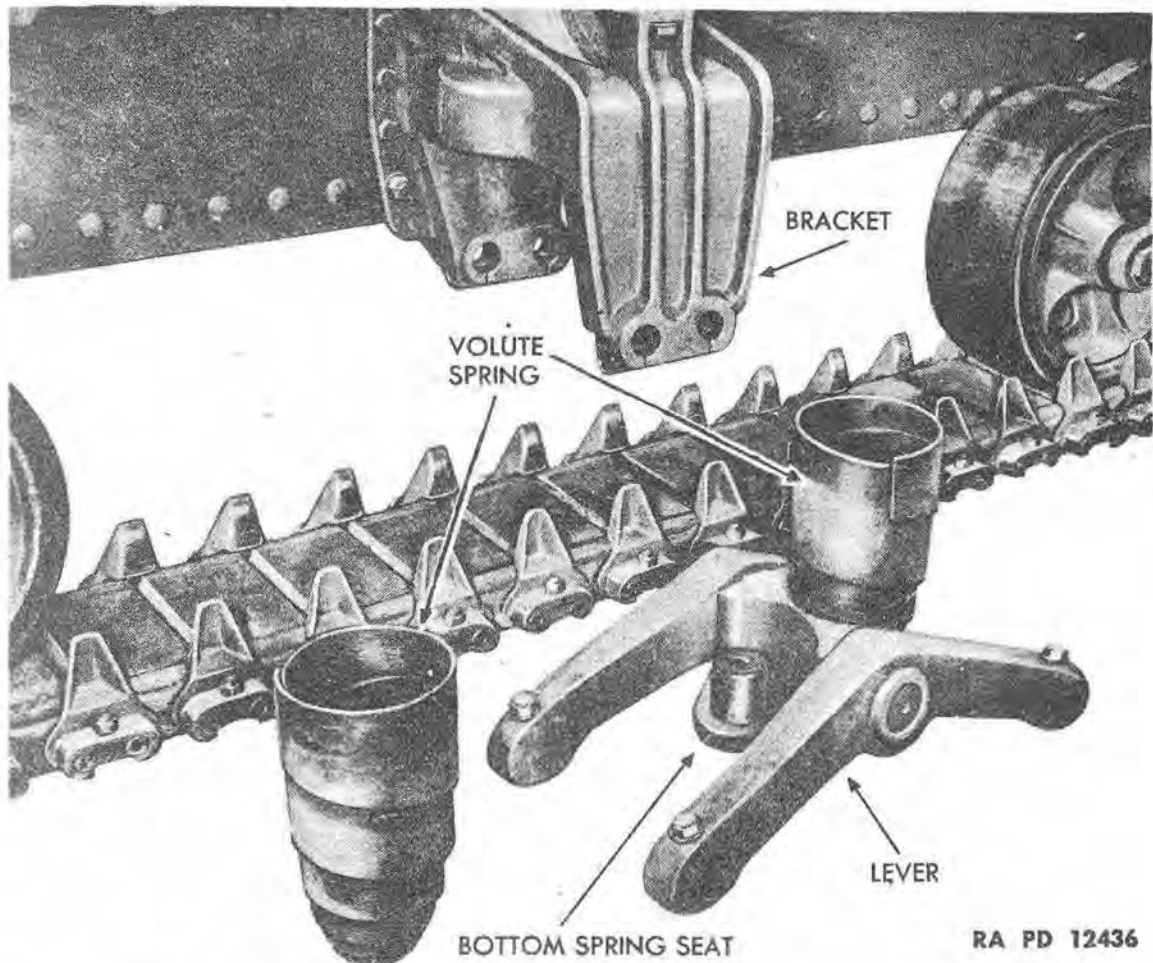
Volute Springs, Levers and Bottom Seat Removed and Partially Disassembled
